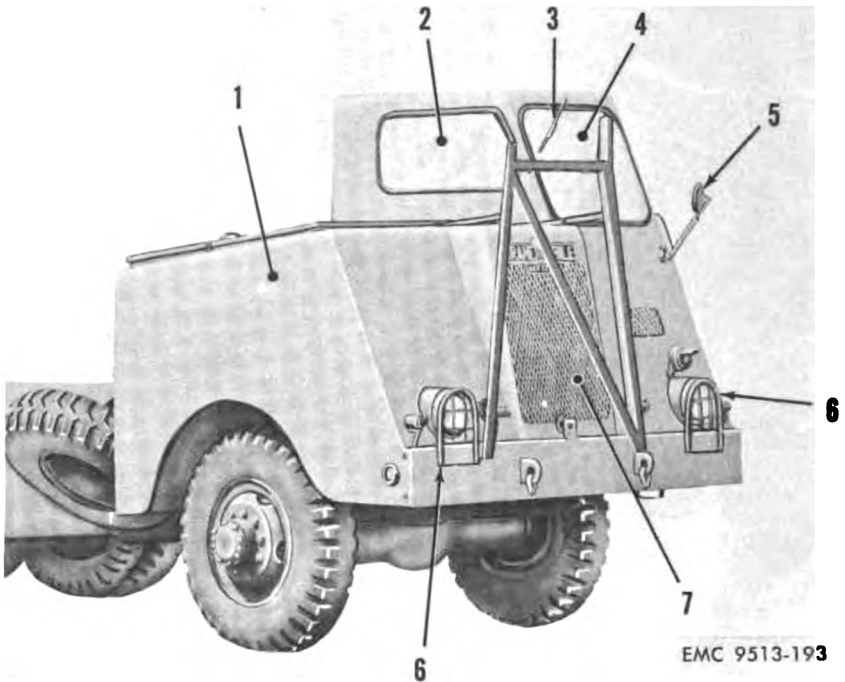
Carrier cab assembly, left rear, three-quarter view.
